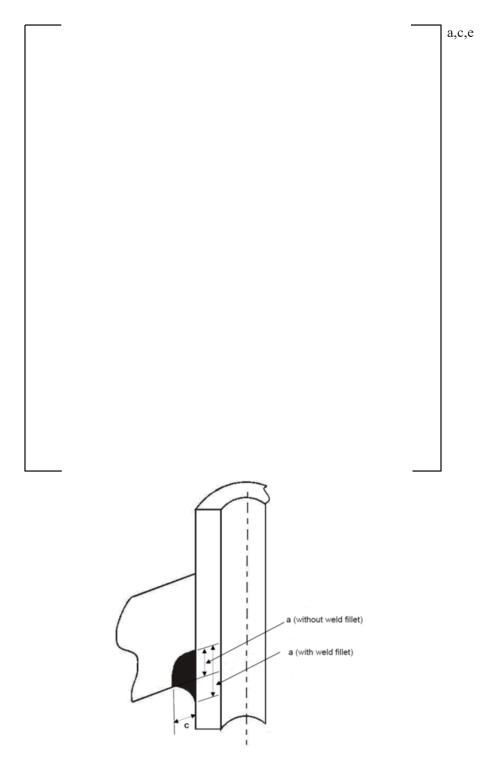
Definition of J-Groove Weld Dimensions
